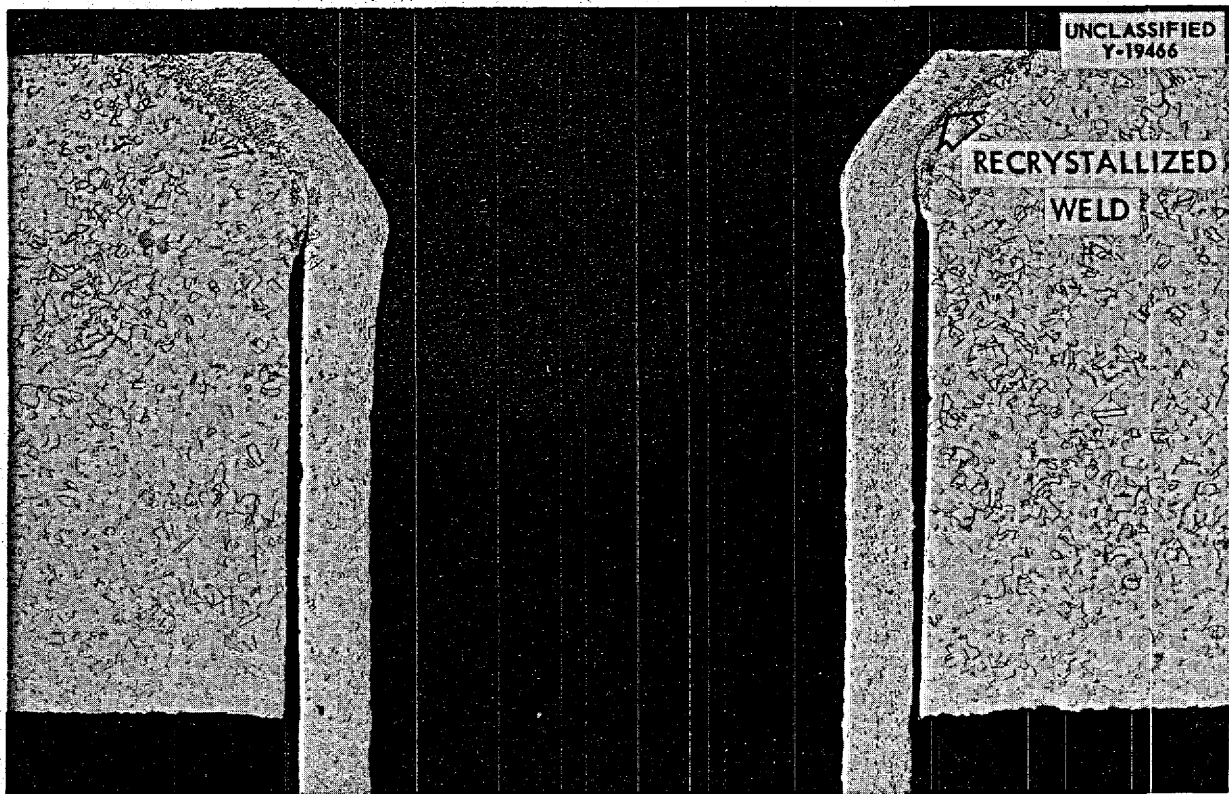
As-Received Tube-to-Header Joint Welded by the "Flange-During-Welding Method." The recrystallized area and the worked portion of the tube can be seen at the top of the header plate. Etched with aqua regia. 12X.
